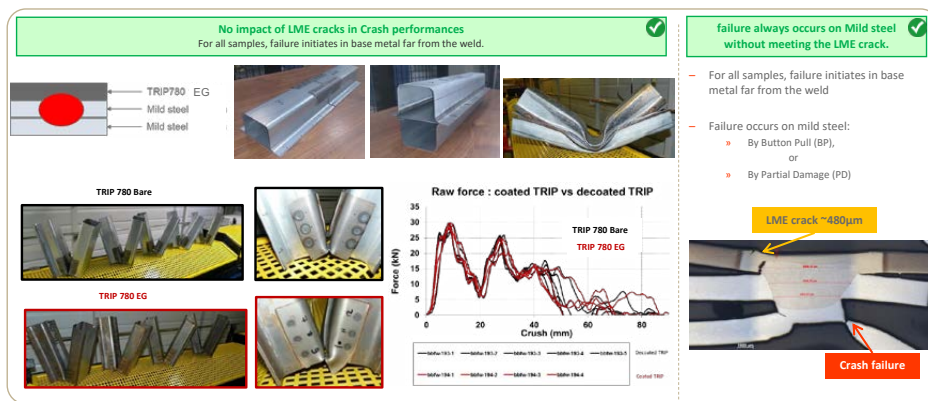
Impact of LME cracks on crash behaviour on welded component.
